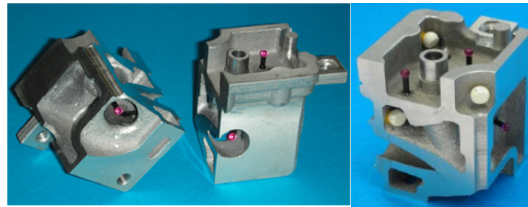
DISMOUNTABLE WORKPIECE-NEAR REFERENCE BODY [74] (LEFT); MINI-CYLINDER HEAD WITH ZTA SPHERES [75] (RIGHT)
